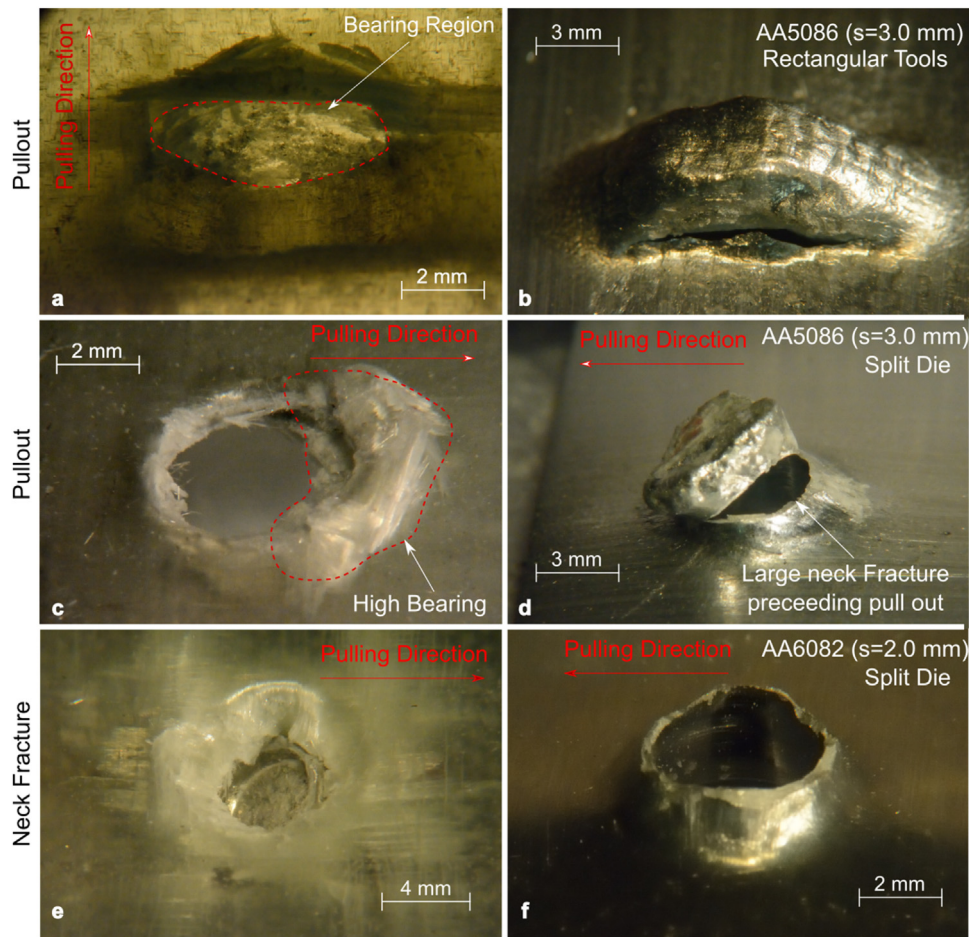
Failure modes in hybrid aluminum-GFRP joints: (a–b) pull-out; (c–d) neck fracture with large GFRP bearing; and e–f) neck fracture.
